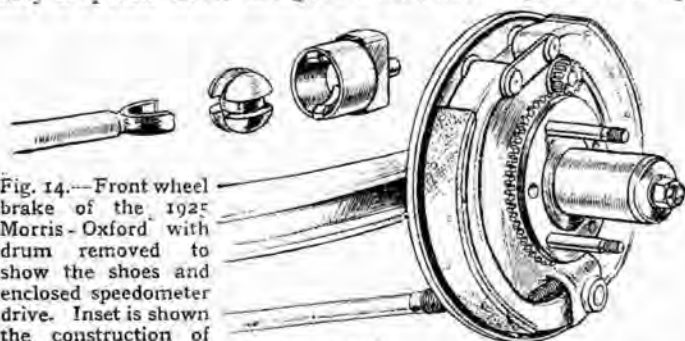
Front wheel brake of the 1925 Morris-Oxford with drum removed to show the shoes and enclosed speedometer drive. Inset is shown the construction of the universal joint in the operating rod.
